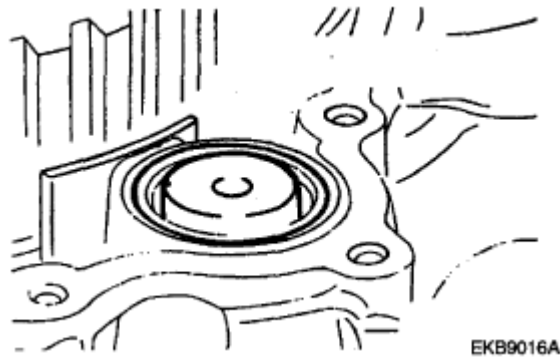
Identifying Reverse Clutch Reaction Plate And Clutch Disc Set
